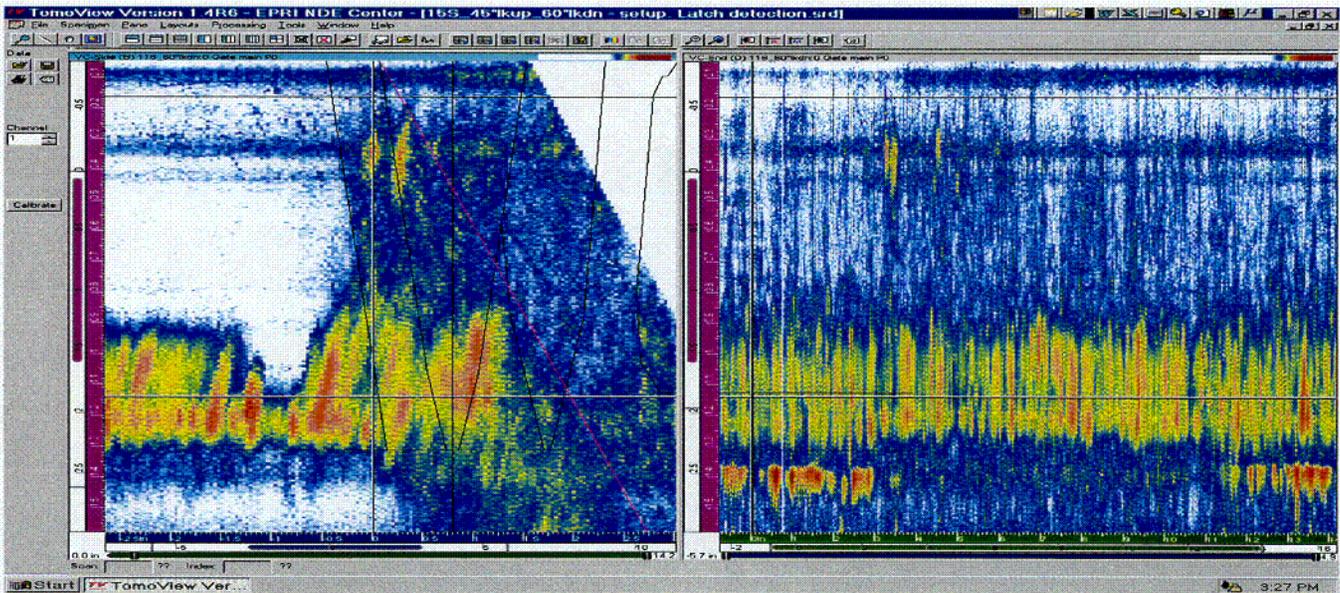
Ultrasonic image of blank nozzle to safe-end weld. Weld configuration is shown in the side view as a line drawing on the left. The other view is a B-scan end view.
